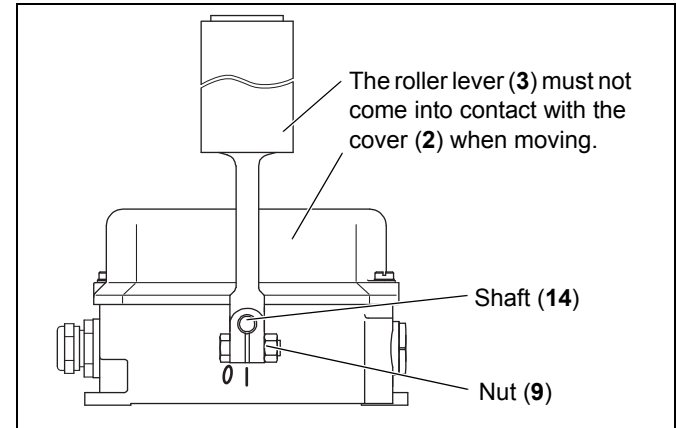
Mounting the roller lever on the belt misalignment switch
